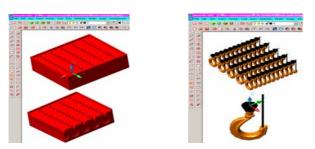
Left: Multiple pieces hook mold design, Right: Final Product of Hook by DP Method (conceptual)
